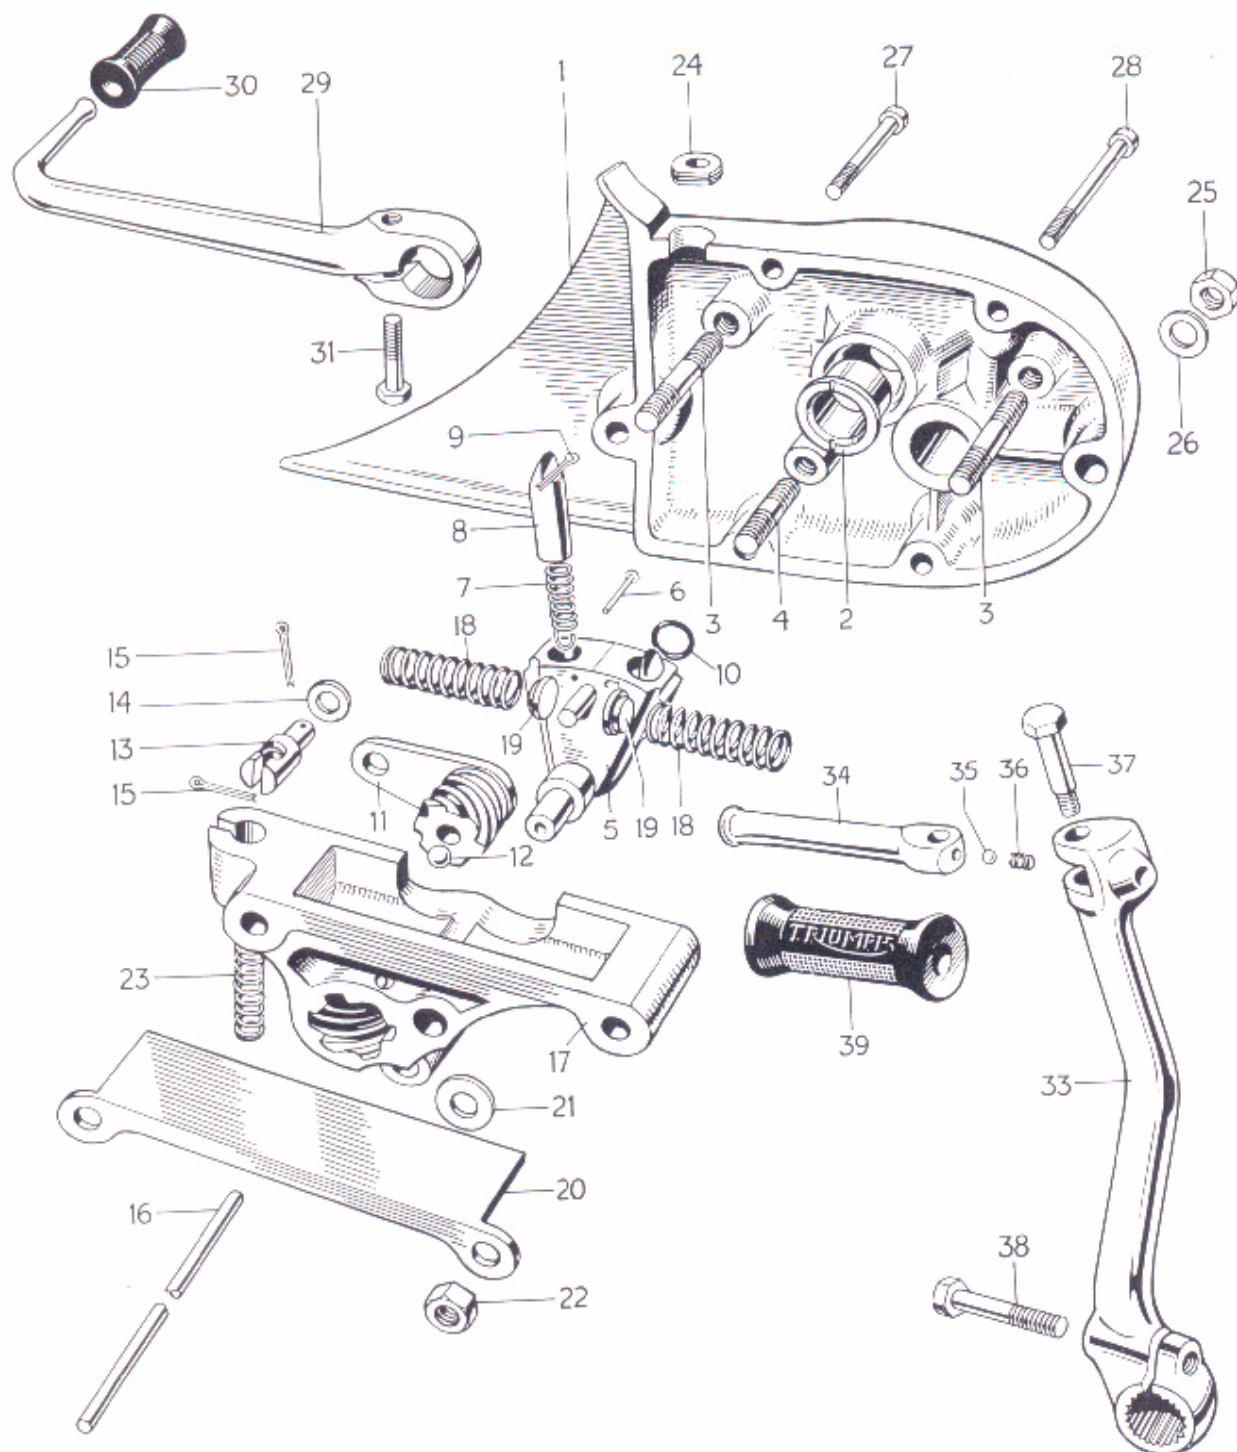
GEARBOX OUTER COVER AND LEVERS.
